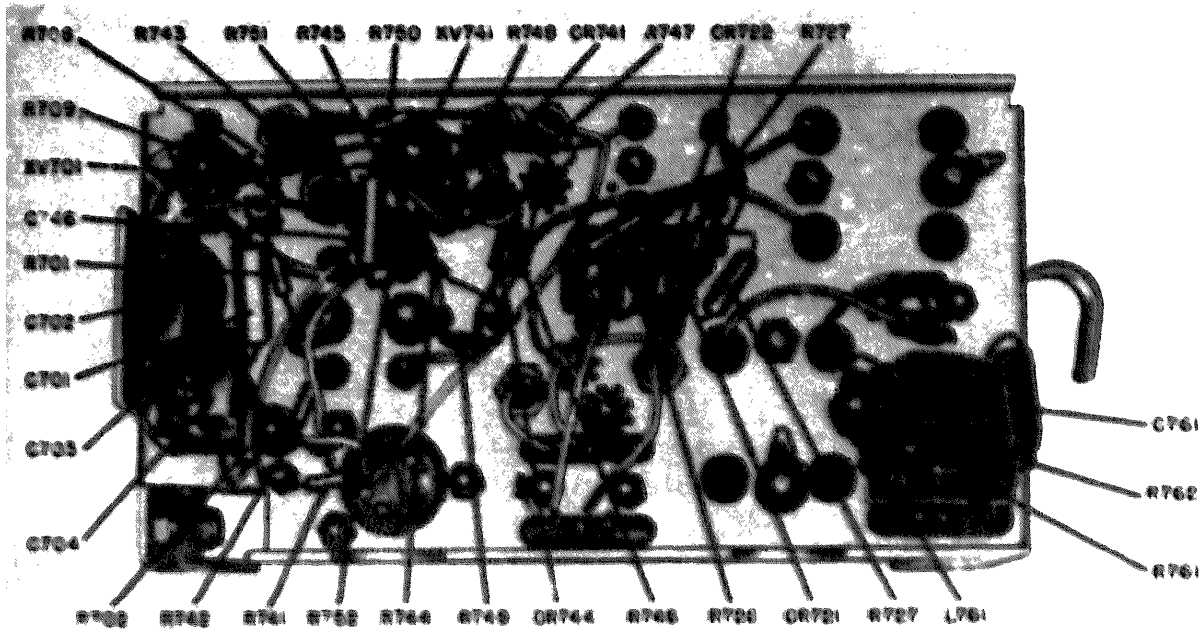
Auxiliary circuit bracket assembly, bottom view, circuit element location diagram (AM-688/POC-8)
